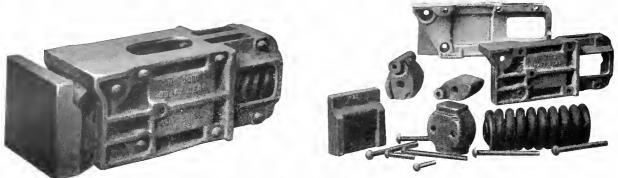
Butler Friction Draft Gear, No. 330. Piper Patents, with Standard 6¹/₄-in. x 8-in. and 8-in. x 8-in. Springs.
